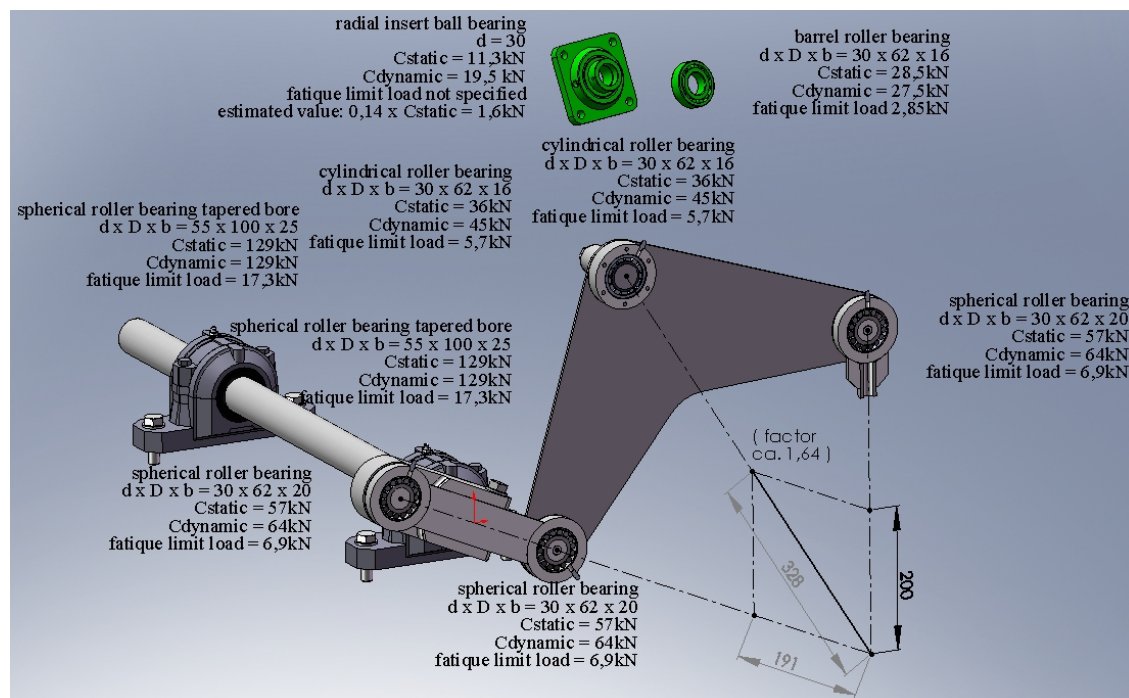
view of bearings used. Note tumbler bearing: cylindrical roller bearing (with weaker alternatives shown in green)
